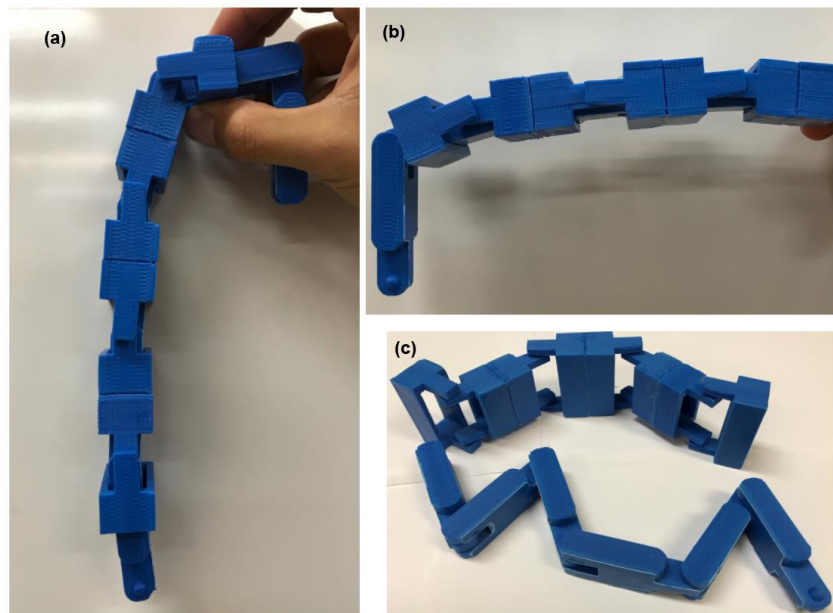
3D printed SLL's dual stiffness actuated by the inner chain sliding motion. (a) Soft state 3D printed SLL (b) Stiff state 3D printed SLL, which can hold its only mass (c) Separated inner chain and the outer case using 3D printing technology.
